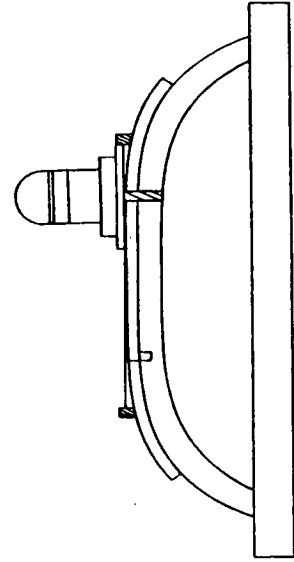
Router Runs Against Fence And Cuts Hole For Rotor Shaft
